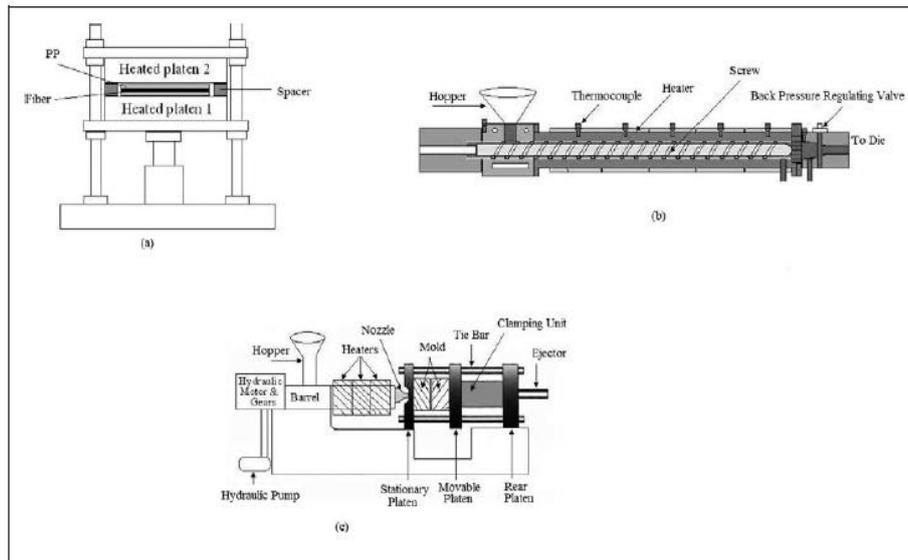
(a) Compression, (b) Extrusion and (c) Injection Molding Machines^{6,7,8}
